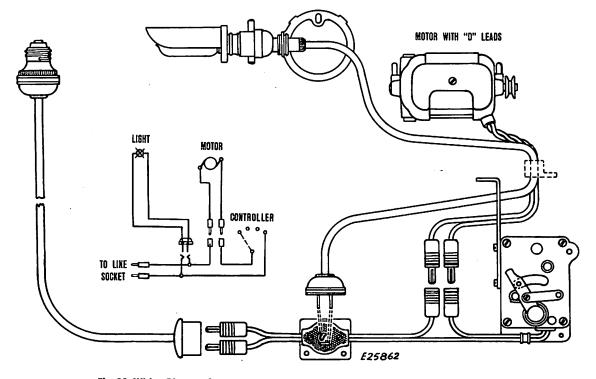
Wiring Diagram for BU3D to BU92D Motors on 66-6 Machine in Cabinet Set No. 20
